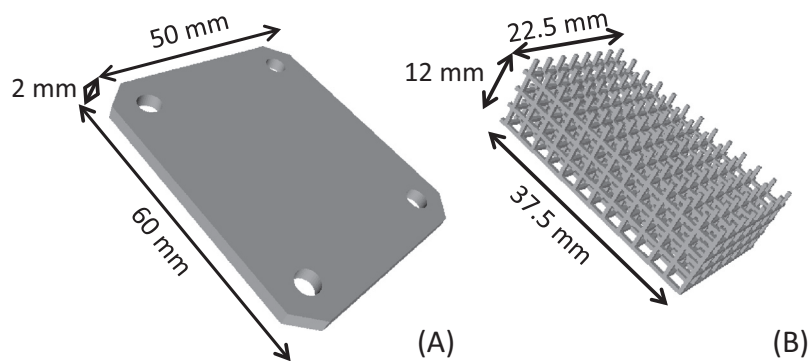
Computer aided design drawings of the 3D printed membrane (A) and anode (B).
